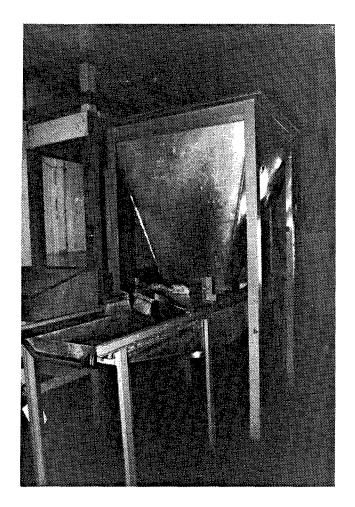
Building 9513-2: Tray loading unit that includes hopper and table, manufactured in 1955.
